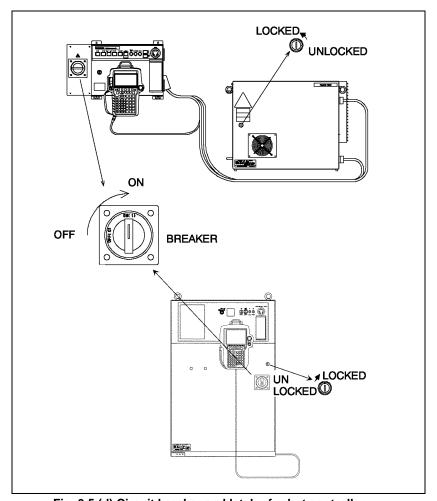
(d) Circuit breaker and latch of robot controller
